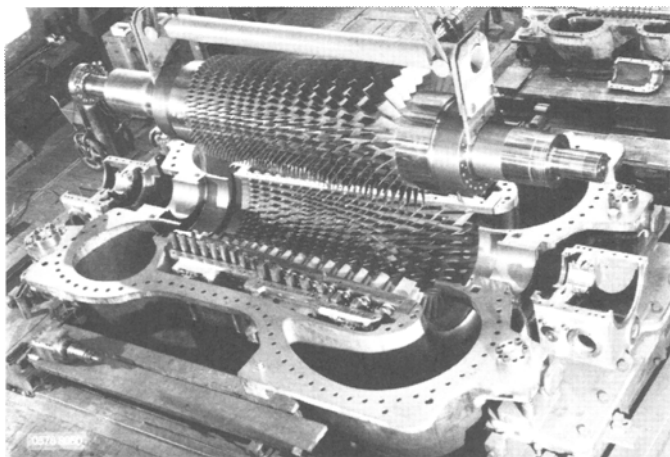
Axial compressor Type AV 100-16, during erection. Note stationary and rotating blades. Two identical steam turbine-driven machines supply air to blast furnace at steel works. Suction volume = 560,000 Nm³/h; discharge pressure = 6.2 bar; power input = 52,000 kW each. (Used by permission: Bul. 26.13.10.40-Bh, ©Sulzer Turbo Ltd.)
